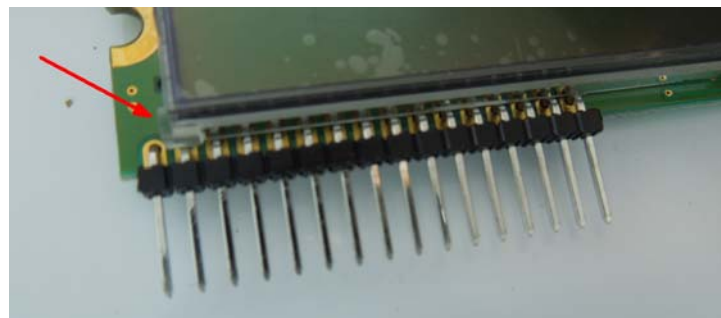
Insert header into display module – DO NOT SOLDER THE PINS YET !!
